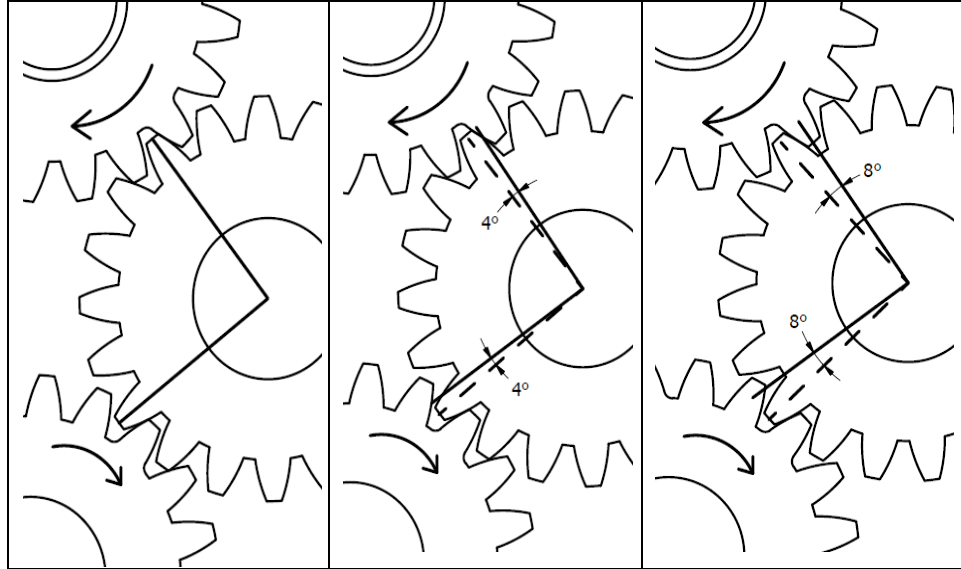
Gear train with one idler gear in single tooth contact at 0°, 4° and 8° angular positions.
